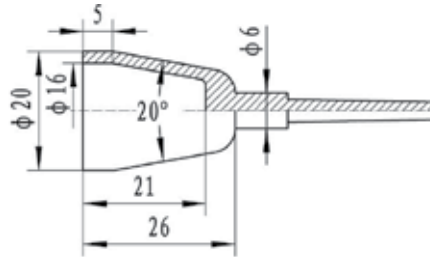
Shape and dimensions of the cup sample used in the on-line measurement (Wang et al., 2010a).
